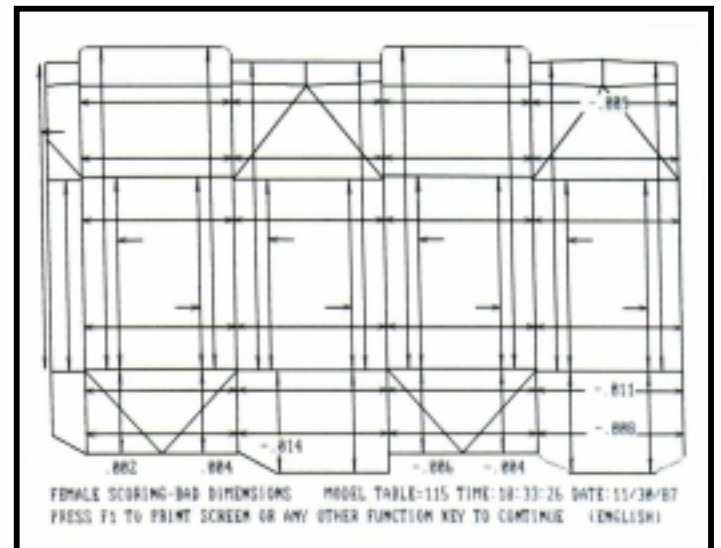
The ACT II system can be instructed to report only dimensions that are out of tolerance.
